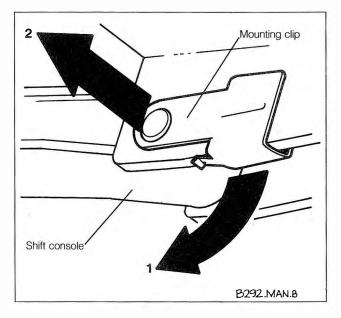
Front mounting clip for aluminum shift console. Remove by first unclipping (1), and then sliding pin and clip out (2).
